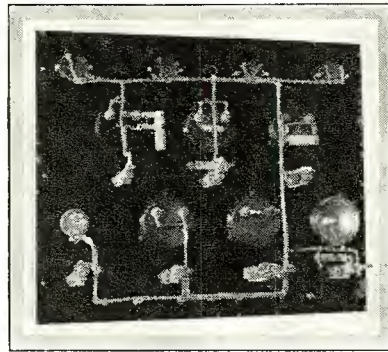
This photograph shows a rear view of the tube tester after all of the wiring has been put in and properly cabled
